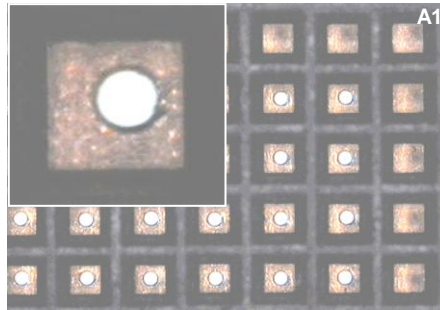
A - Alignment gauge aligned properly with PCB conductor pads (PCB conductor pads centered in gauge holes).
